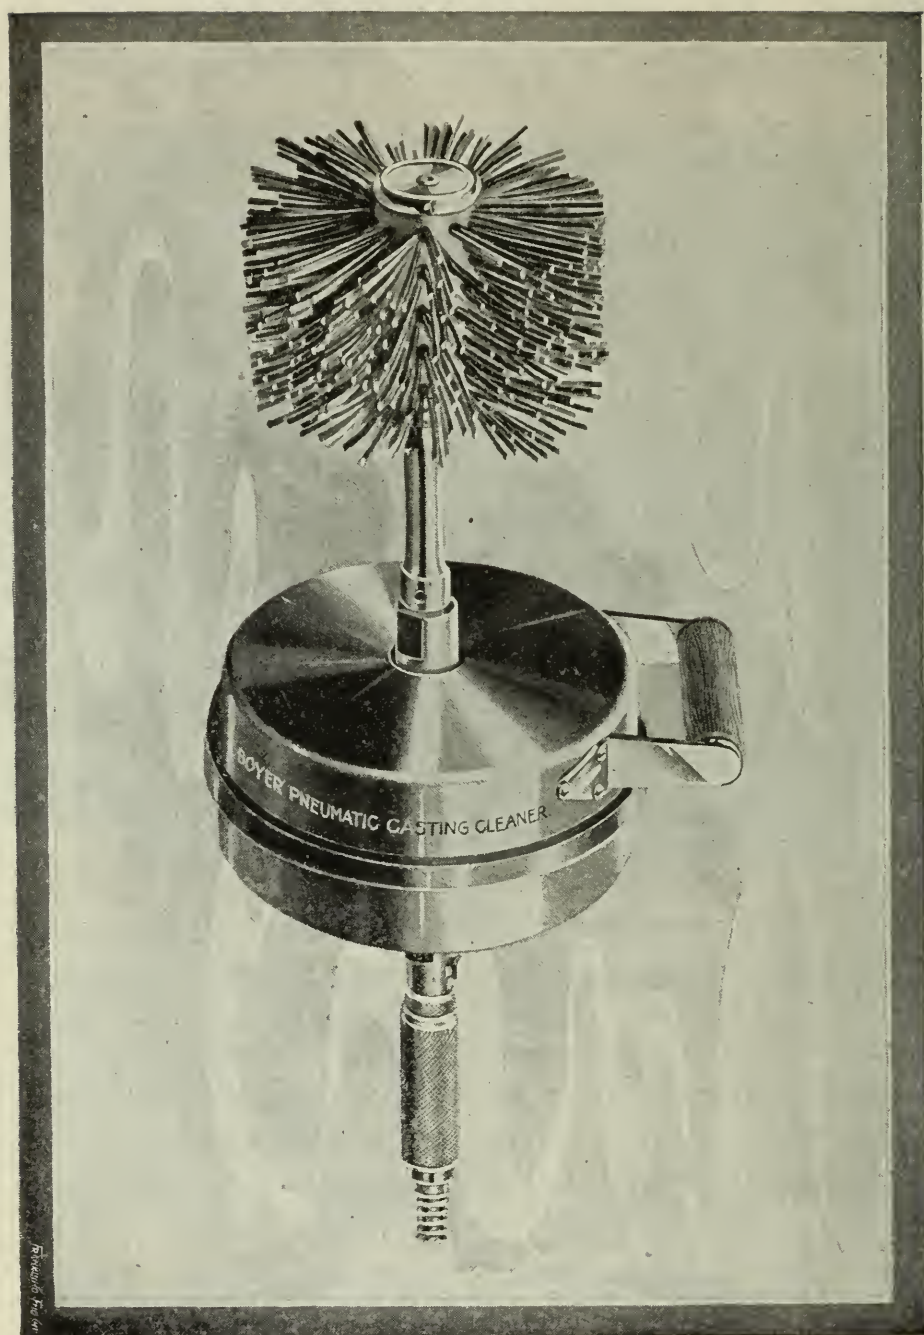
Pneumatic casting cleaner. Weight, 10 pounds.
